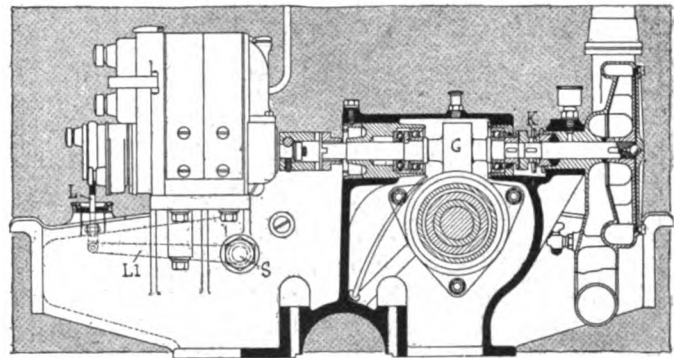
Ball bearing magneto and pump drive used in Fiat cars
